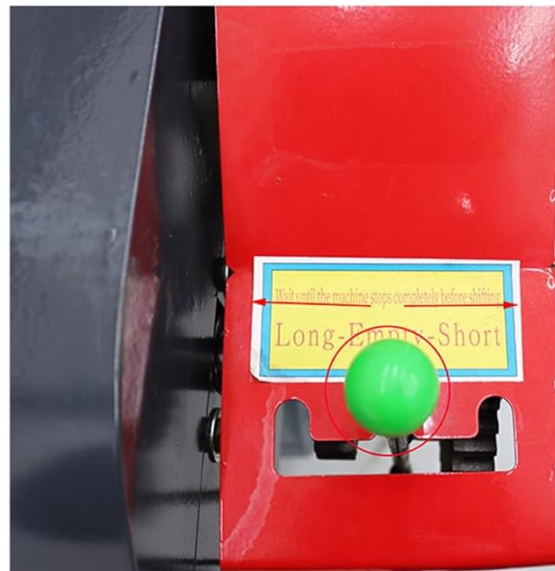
Conveyor Rollers and Length Adjustment. The conveyor rollers adapt to material volume, and the feed length adjuster allows selection between long and short cuts.
